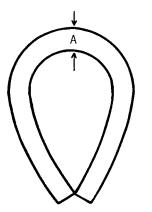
BEND TEST OF VACUUM BRAKE HOSE.
